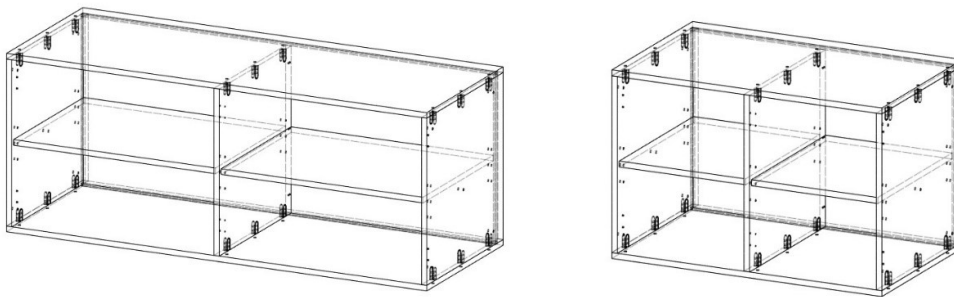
Basic cabinet with joinery for the two extreme length dimensions, 2650mm and 1650mm
